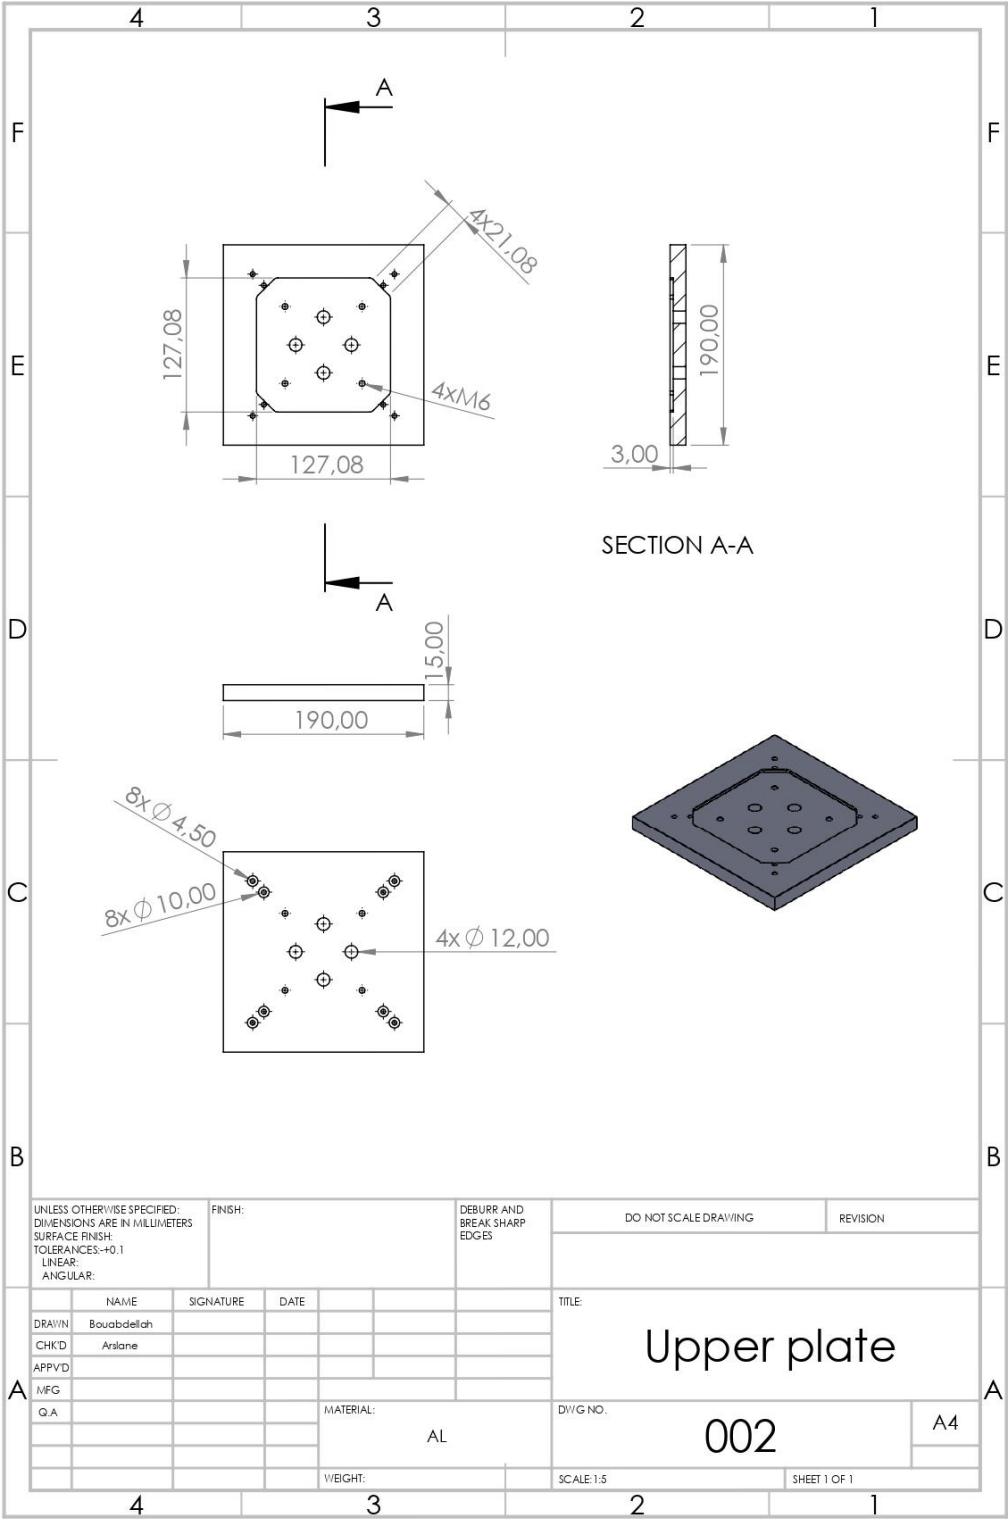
Standardized engineering drawing of the upper plate with dimensions
